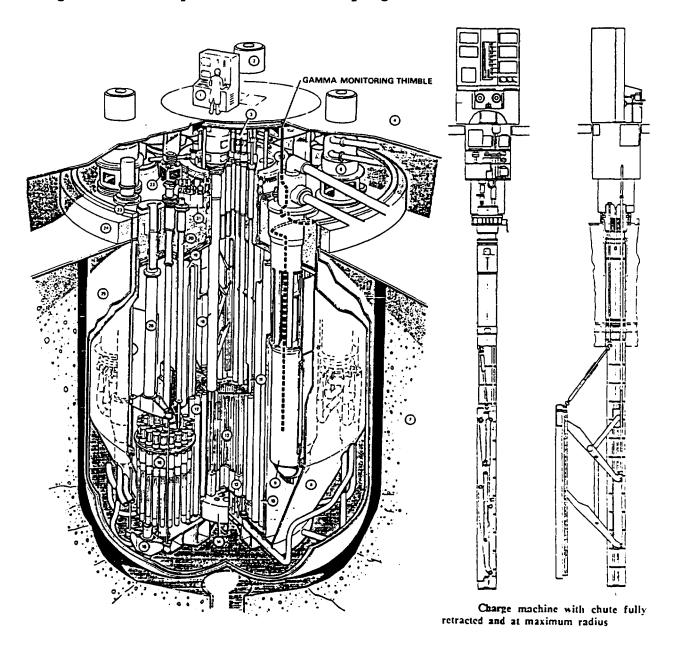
Reactor vessel with transfer rotor and charge machine.
